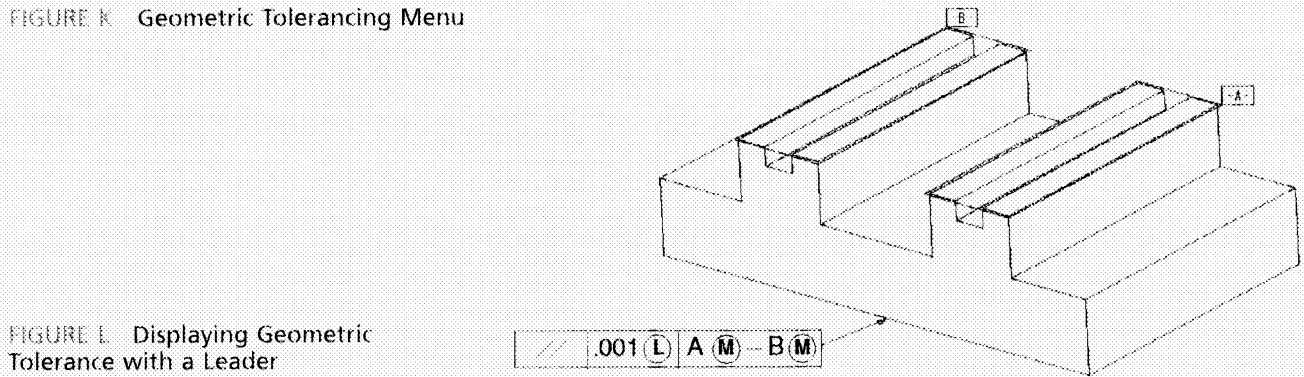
FIGURE L Displaying Geometric Tolerance with a Leader
